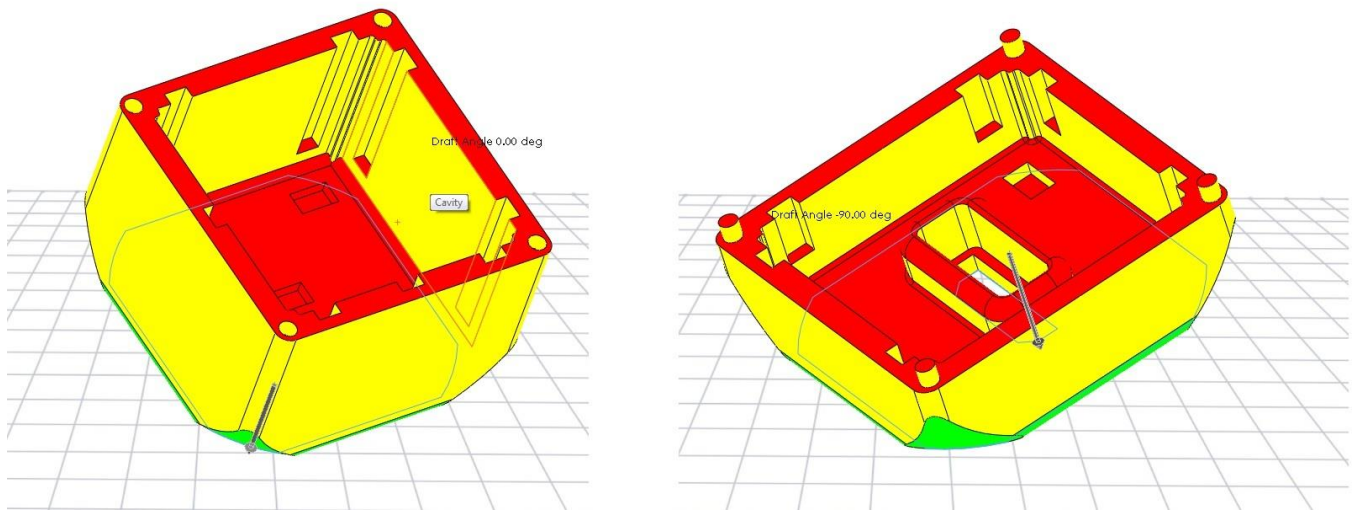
Draft analysis tool indicates, in yellow, faces that require draft angle
